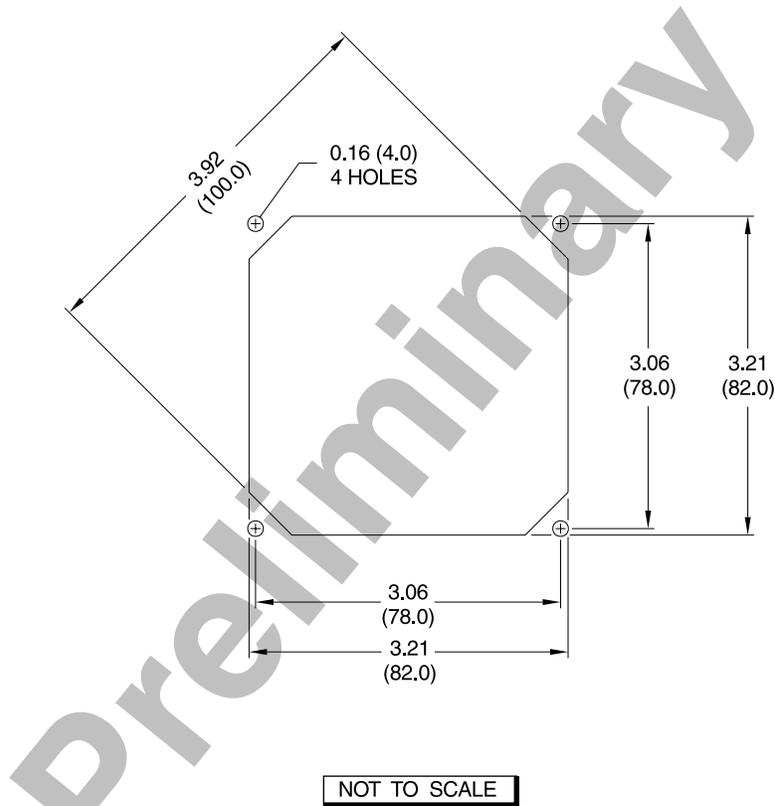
Instrument Panel Cutout and Mounting Holes
